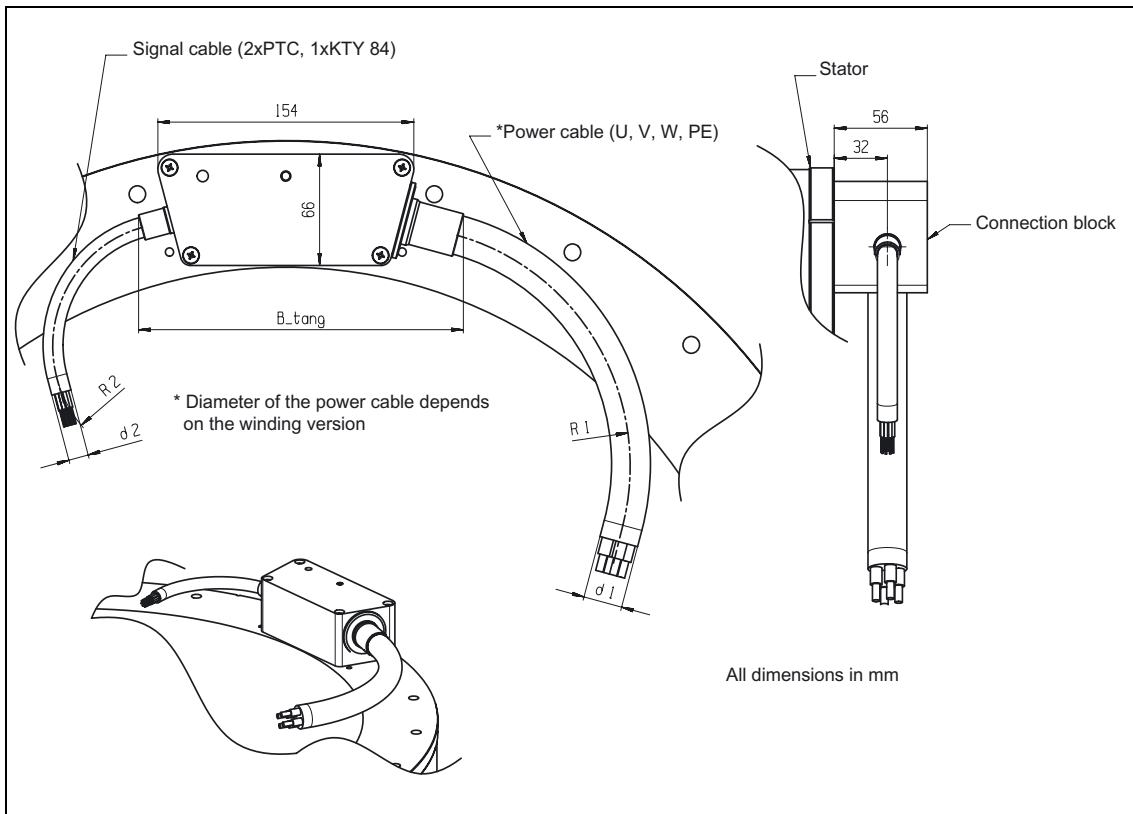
Tangential electrical connection with sleeve for 1FW6290 (motor type B)
